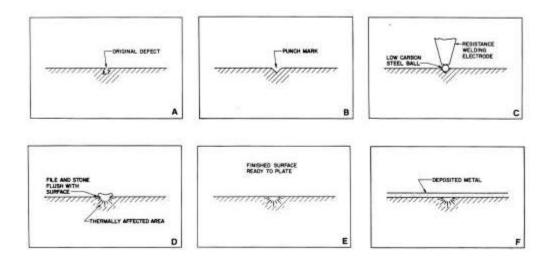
Steps for repairing basis-metal defects using dot welding.
